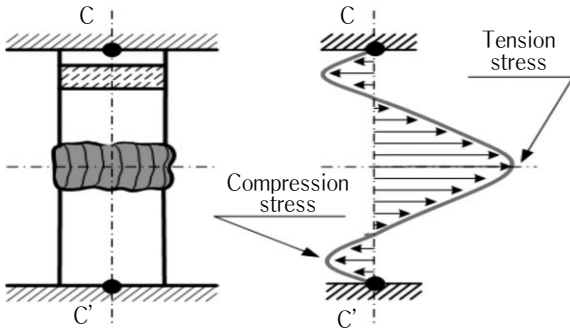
Residual tension stress in weld metal.<sup>(10)</sup>
